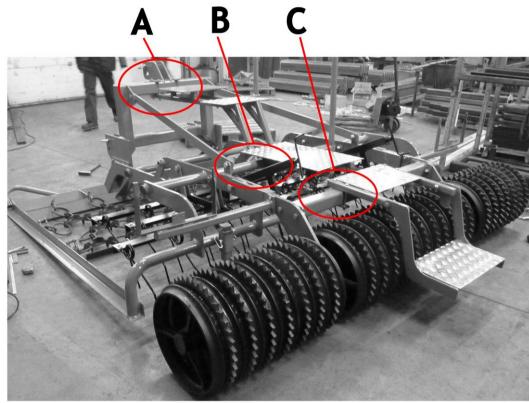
Assembly of the Cambridge roller to HYBRO 3.0 (plan A shown below)
